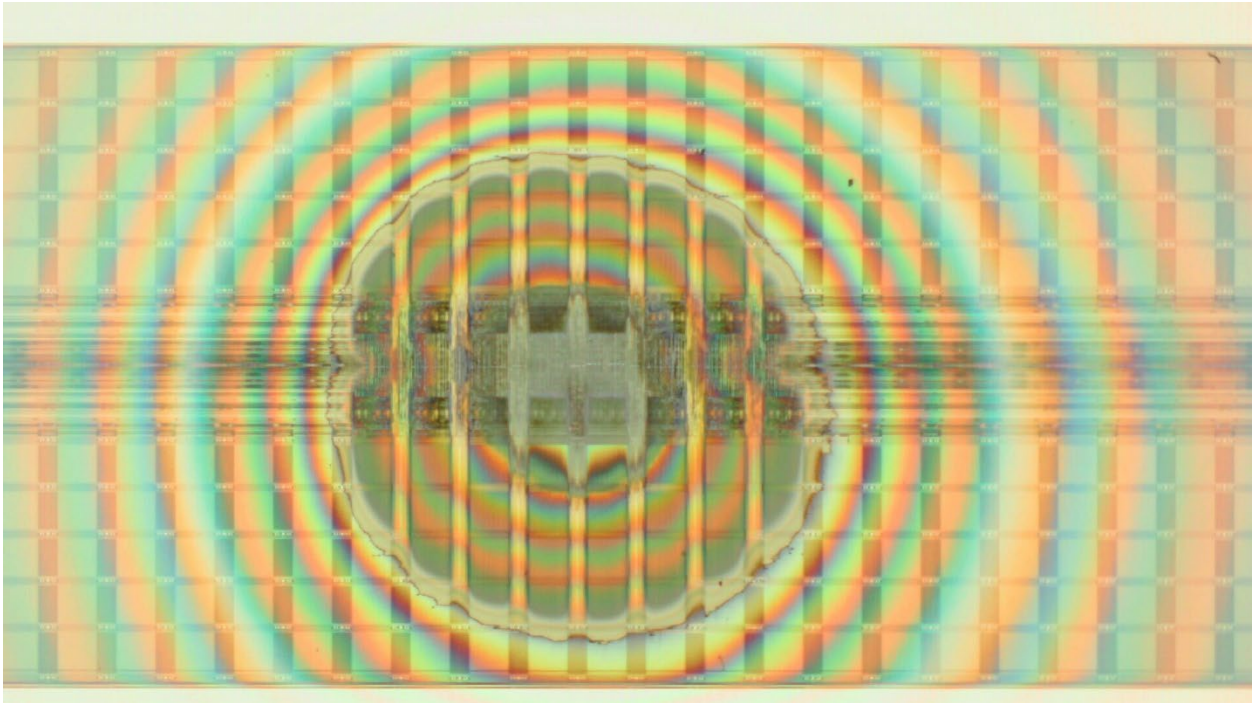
Inspection Image shows Passivation, Top Metal and ILD Removed
